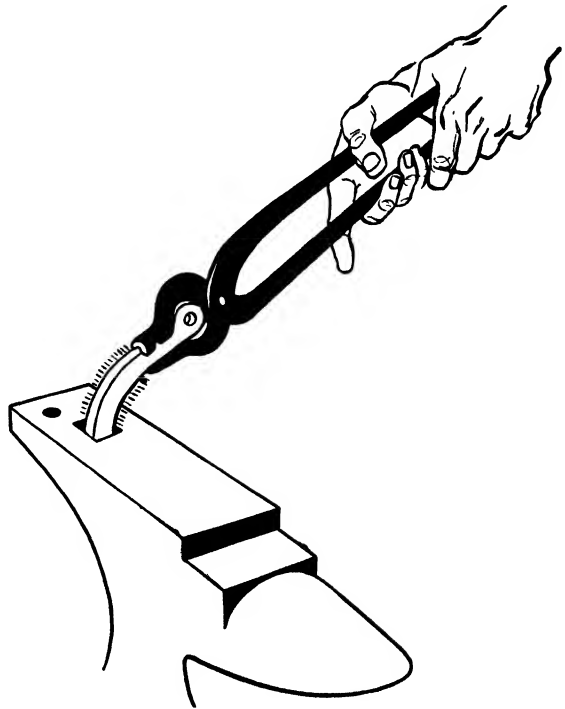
Bending of heavy pieces can sometimes be best accomplished in the hardy hole.
